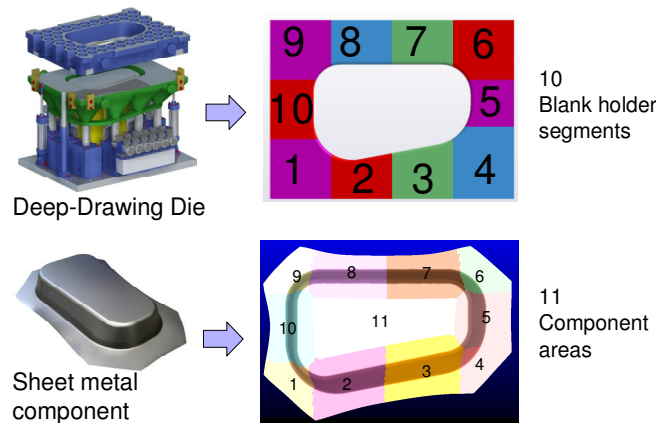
Deep-drawing die and FE-model of segment-elastic blank holder (top), sheet metal component with FE-model of eleven component areas (bottom) (Blaich, 2010)
